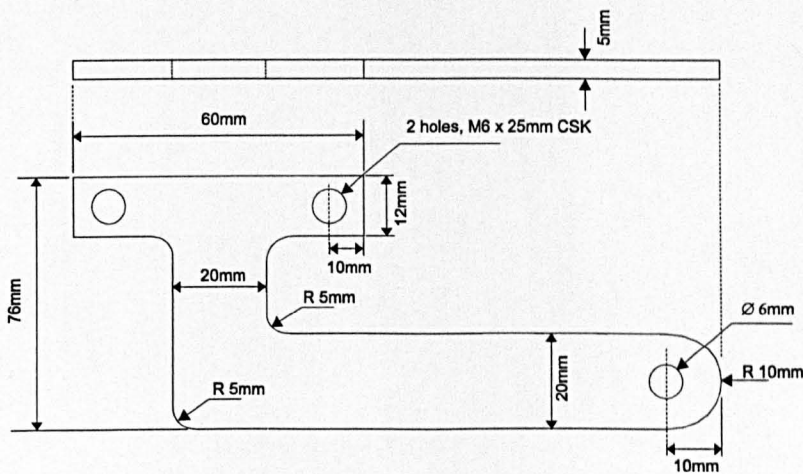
Details of plate and plate support bracket design used in the preliminary investigation.
